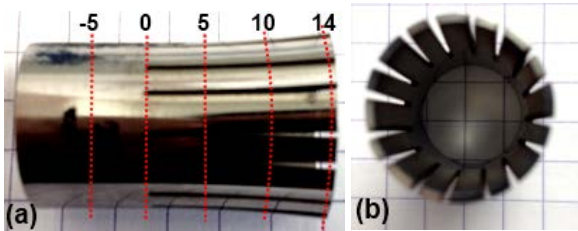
Calibrated tube after EDM machining, (a) side view showing blade bending, (b) axial view.
